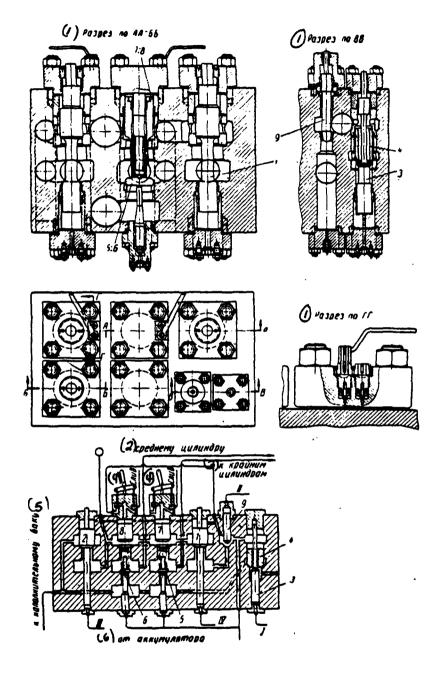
Hydraulic mechanism of the rotation of the shaft of distributor.
